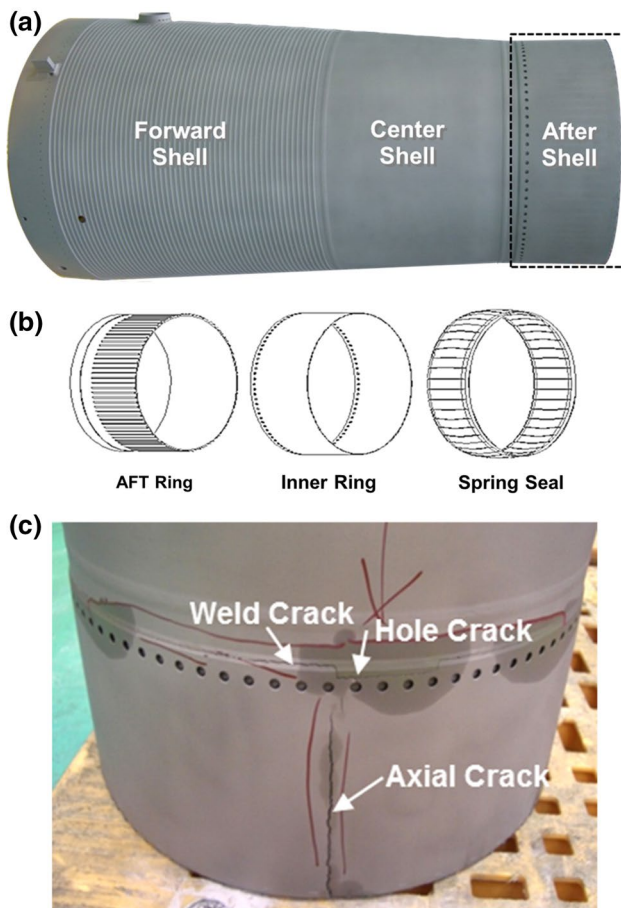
Geometry of the combustion liner: a target combustion liner, b detailed assembly for the after shell, and c real cracks on the combustion liner after shell
